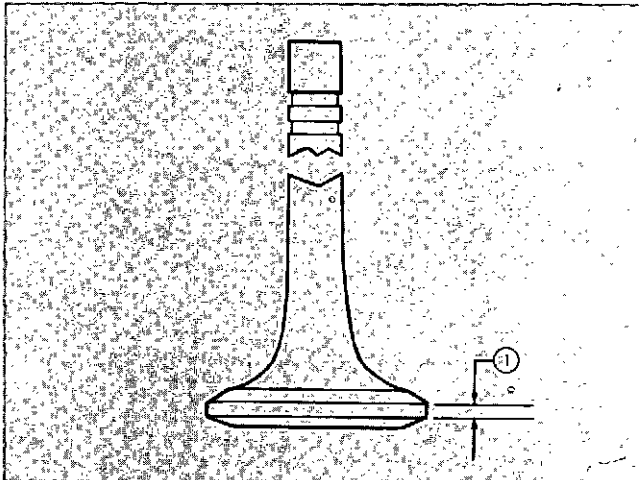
, N10231. Minimum valve head rim thickness
